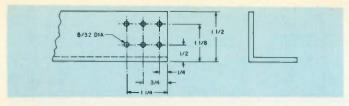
Drill guide dimensions. Make this tool from stock left over from the center support and side arms.
